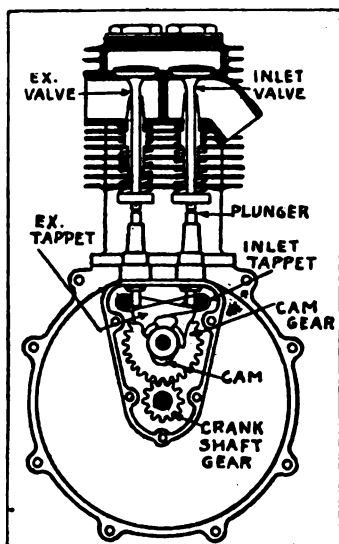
A single cylinder vertical type of engine, with air cooled cylinder. Valves are both on the side and mechanically operated. There are two fly wheels with a crank pin between them. The fly wheels run inside of the aluminum crank case. This type of engine is used on motorcycles, cycle cars, and railroad light cars.
